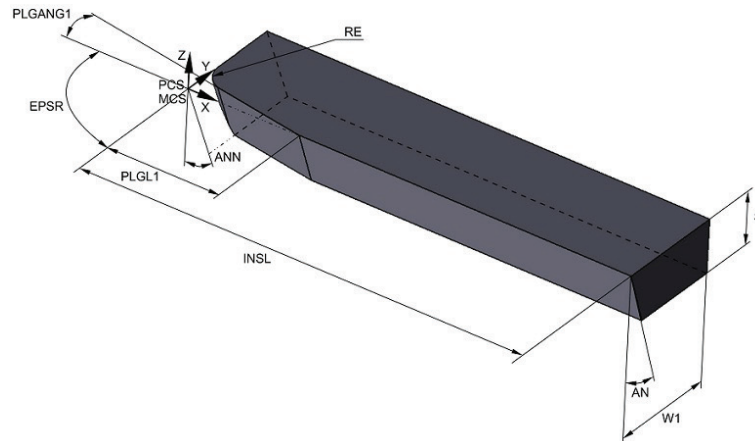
Geometry of a reaming insert with one cutting edge and rounded plug chamfer
